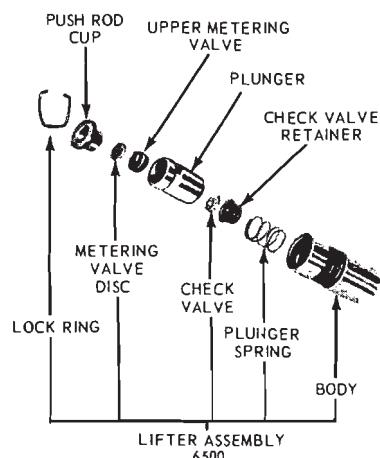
Type II Hydraulic Valve Lifter Assembly
